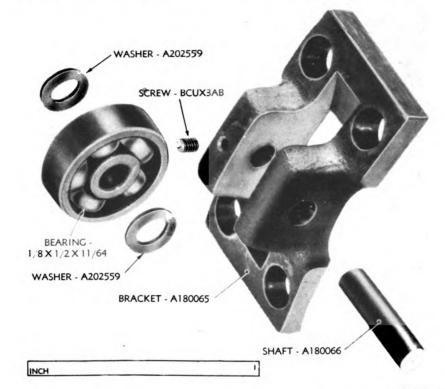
Measuring Drum Roller Bearing Assembly — Exploded View
